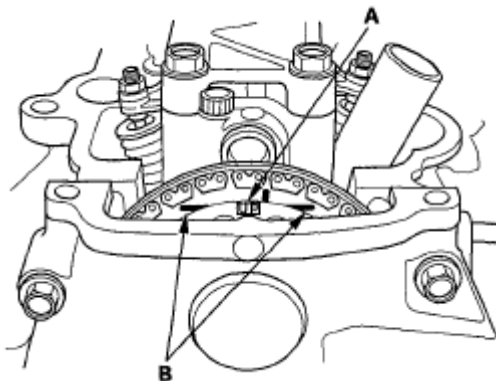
Locating UP Mark On Camshaft Sprocket Should Be At Top
